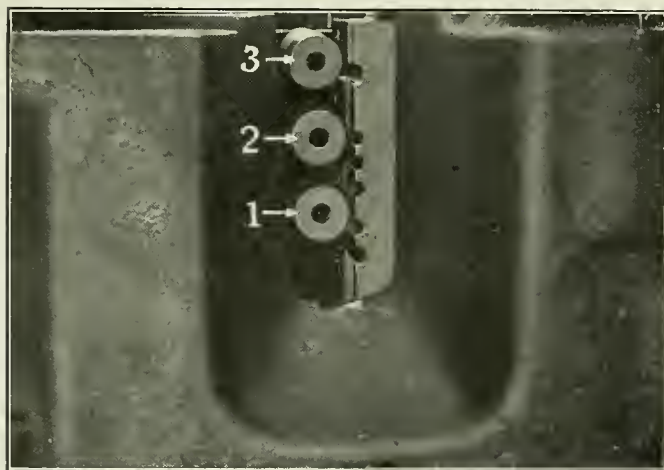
Universal Forging Machine Equipped to Form Brake Shaft Ends
